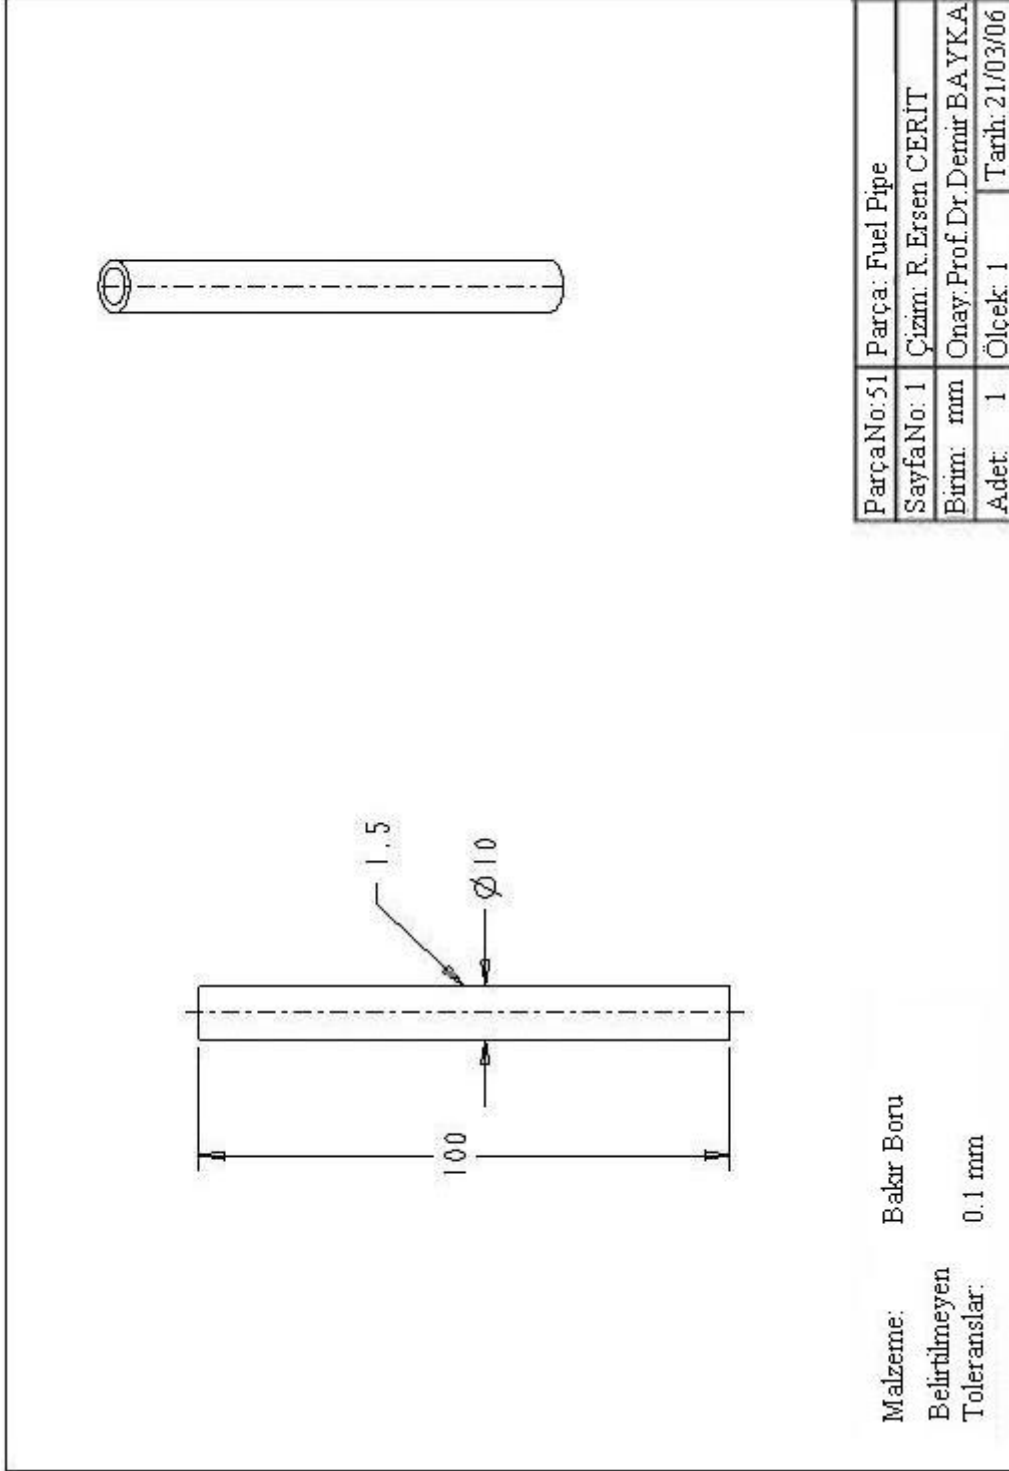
Technical Drawing of the Pipe in Fuel Container Cover.
